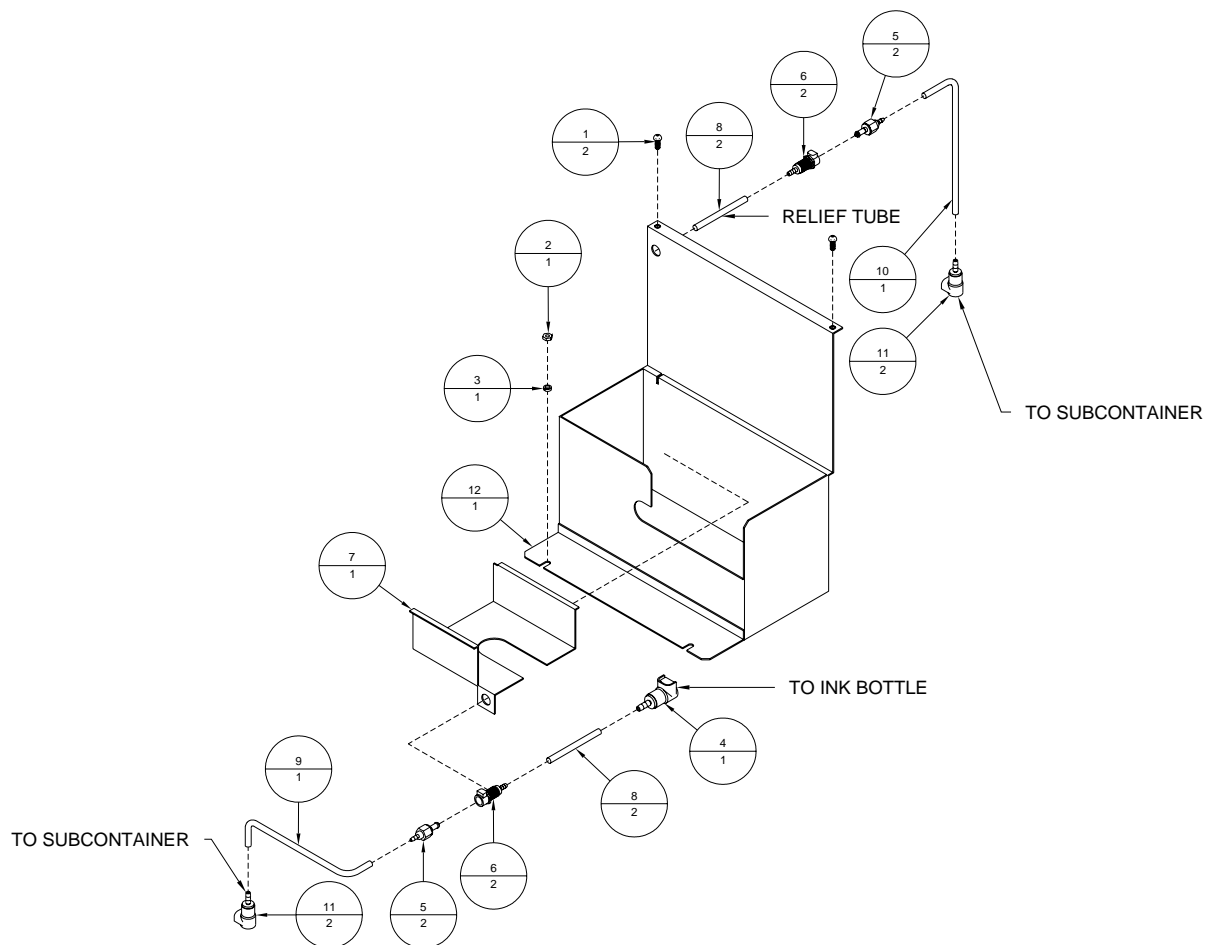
Ink Bottle Bracket Assembly (9103430A)
